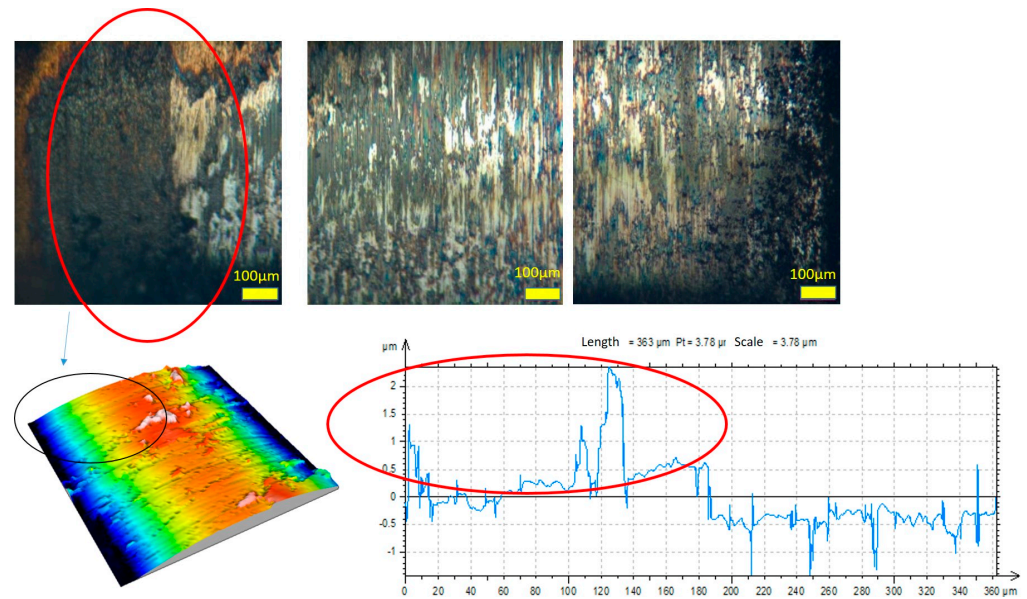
Transfer film recorded on cylindrical shaft bearing surface after 10 h of thermo-vibratory stresses against a polymer-impregnated graphite bearing. Red and black oval shapes show the area observed.
